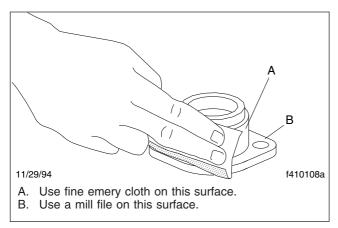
, Smoothing a Full-Round Yoke U-Joint Bearing Cup
